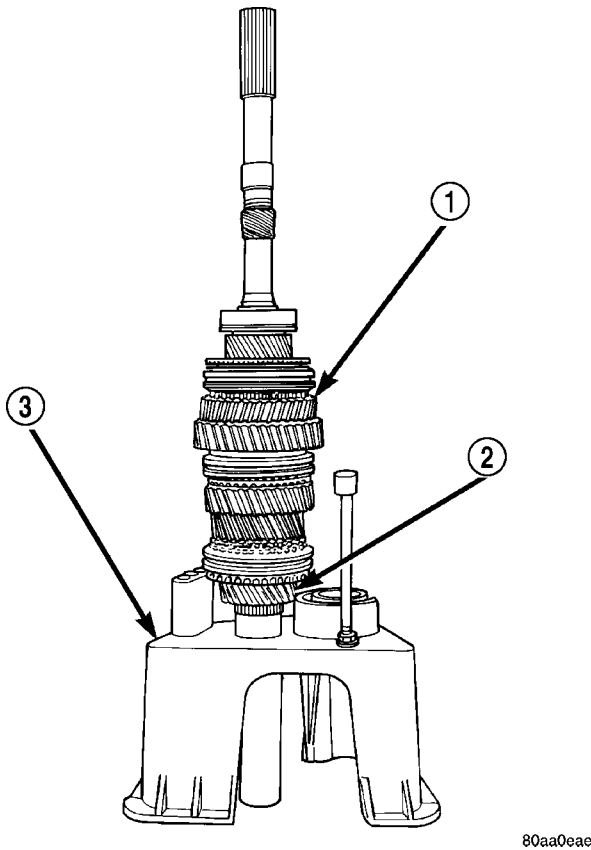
OUTPUT SHAFT AND GEARTRAIN
